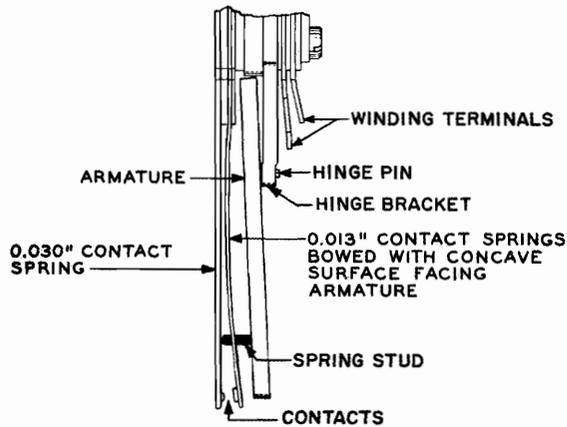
Position of Bowed Spring Before Final Tension Adjustment
